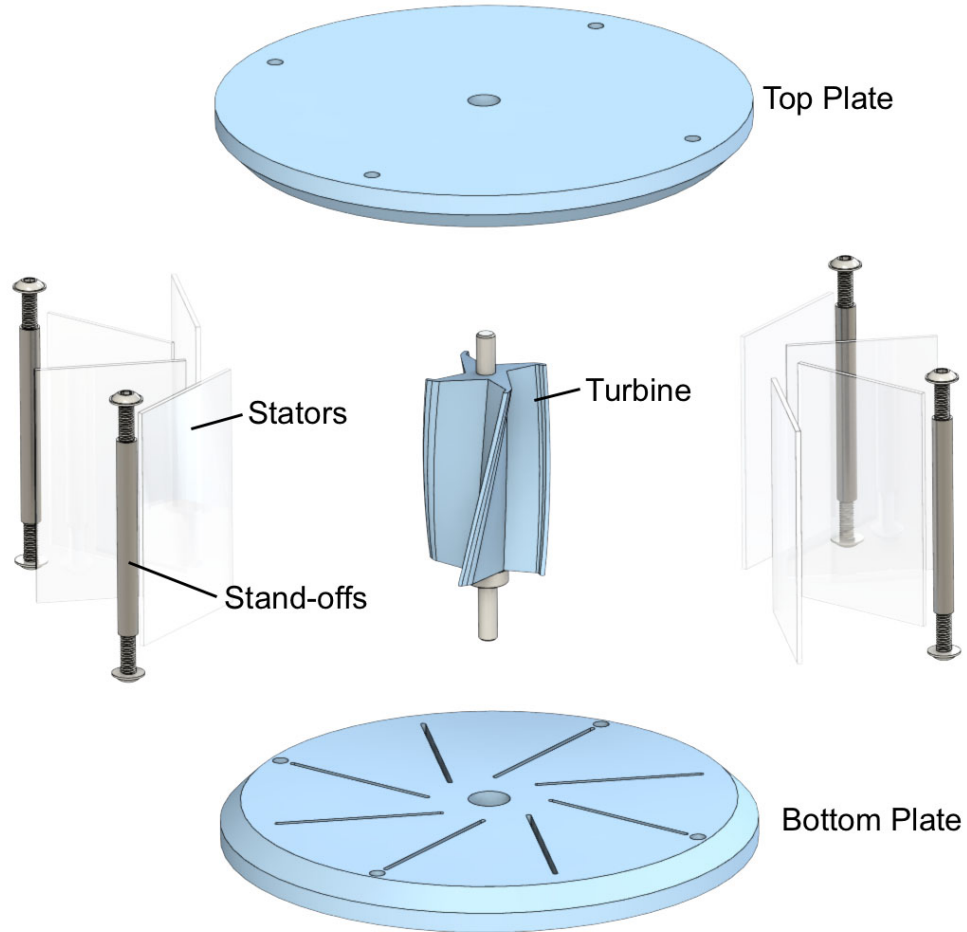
SolidWorks rendering of the 2.5-inch, replica. Exploded parts view
